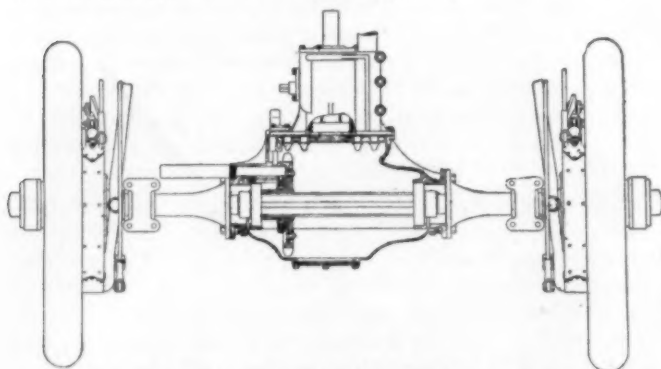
Simple type of Belden gear-set, and rear axle.
